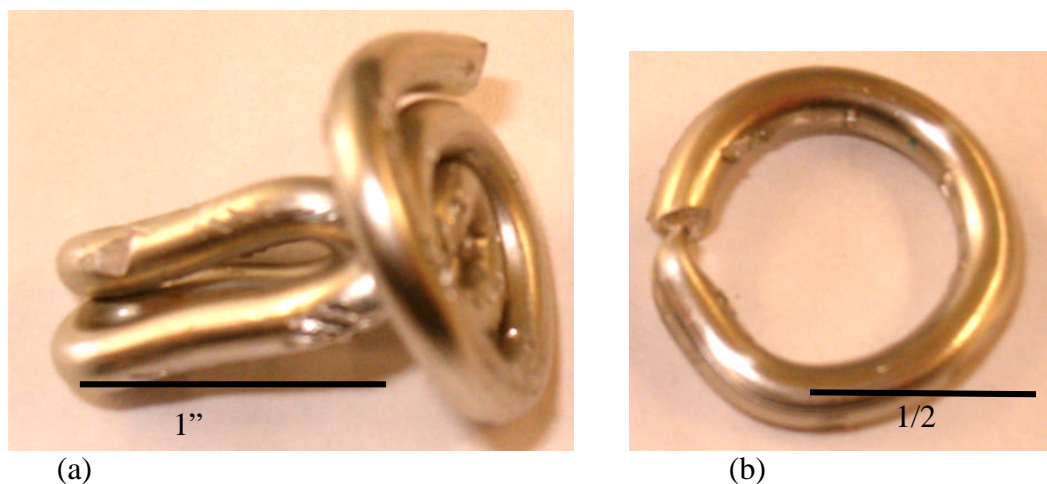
Solder shaping for (a) inside cavity of the plug, (b) and can-plug interface for melting after degassing, to seal the filled can under vacuum.
